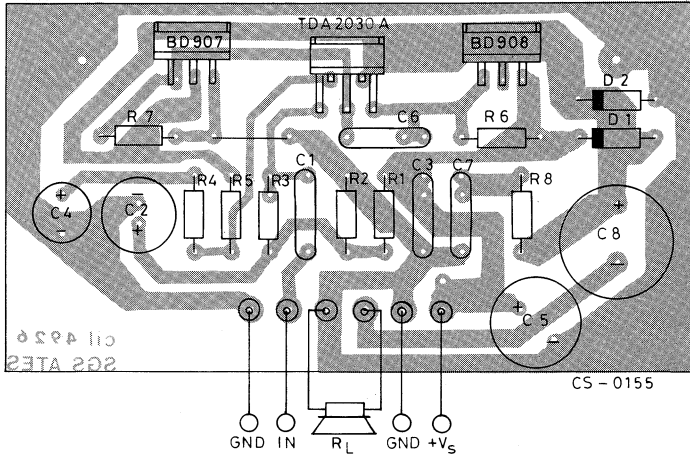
P.C. board and component layout for the circuit of fig. 8 (1:1 scale)
